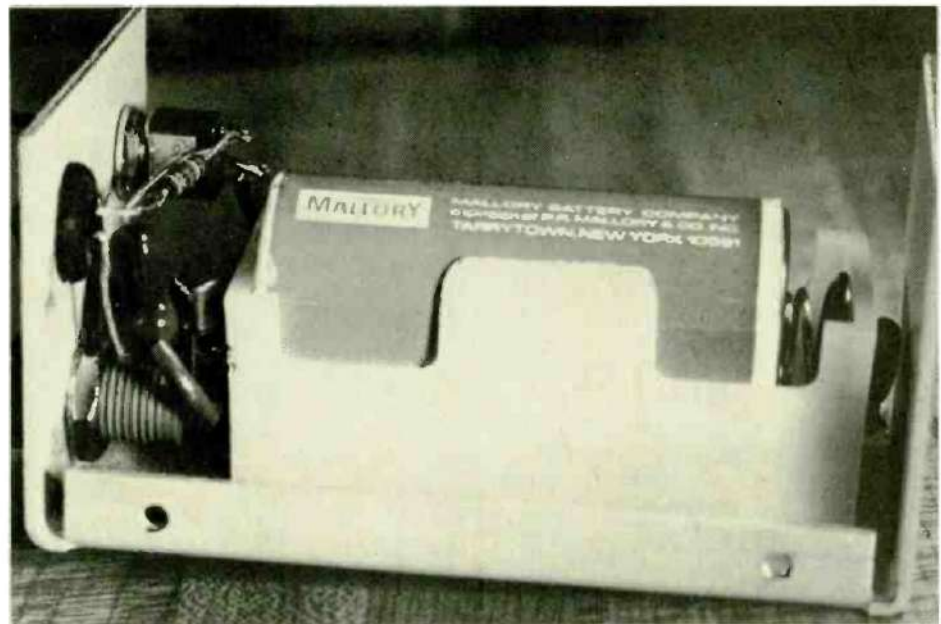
The compact construction of the calibrator is seen here. We wired all components to the terminals of the banana jacks first, and then bolted in the battery holder to the bottom of the chassis to allow working room for assembly. You may choose to utilize either perfboard or even a printed circuit board for your model. This will allow you to mount it directly inside the cabinet of whatever test instrument you wish to calibrate. With this method you can always have a reliable source of instrument calibration with you, no matter where you might happen to be doing your repair or field operations.
